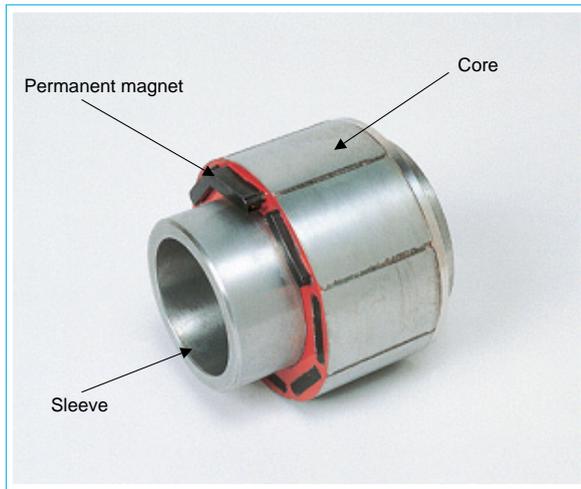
Rotor cut model of internal permanent magnet-type spindle motor
